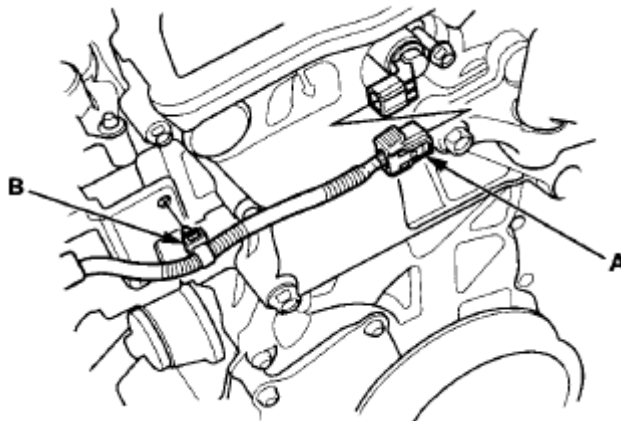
Identifying VTC Oil Control Solenoid Valve Connector And Harness Clamp
